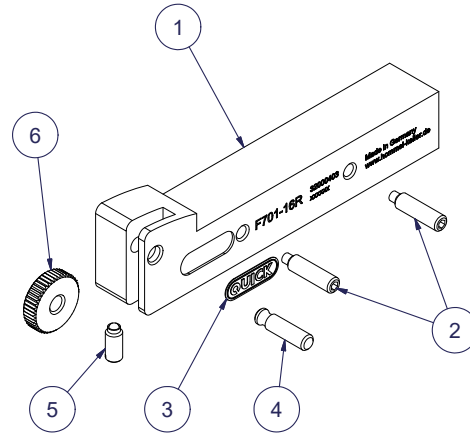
Series F701 exploded drawing (swiss-type lathe)
